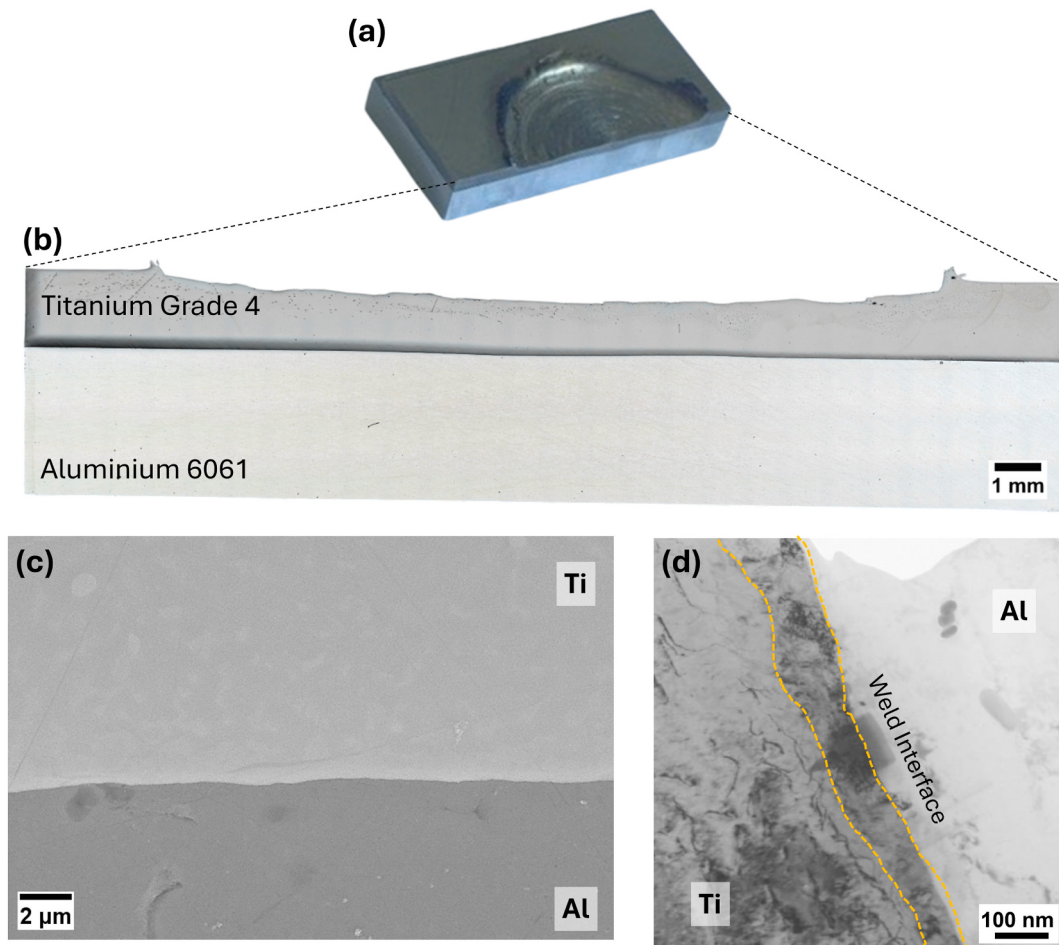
(a) Image of the spot FMB Ti-Al weld sample sectioned through the weld mid-section; (b) optical micrograph of the weld interface; (c) SEM and (d) BF-TEM observations of the spot FMB weld between Titanium Grade 4 and Aluminum 6061 with counter-pressure.
